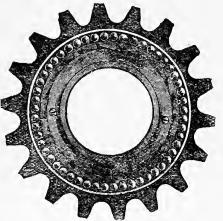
Pawl and Ratchet Freewheel Clutch
